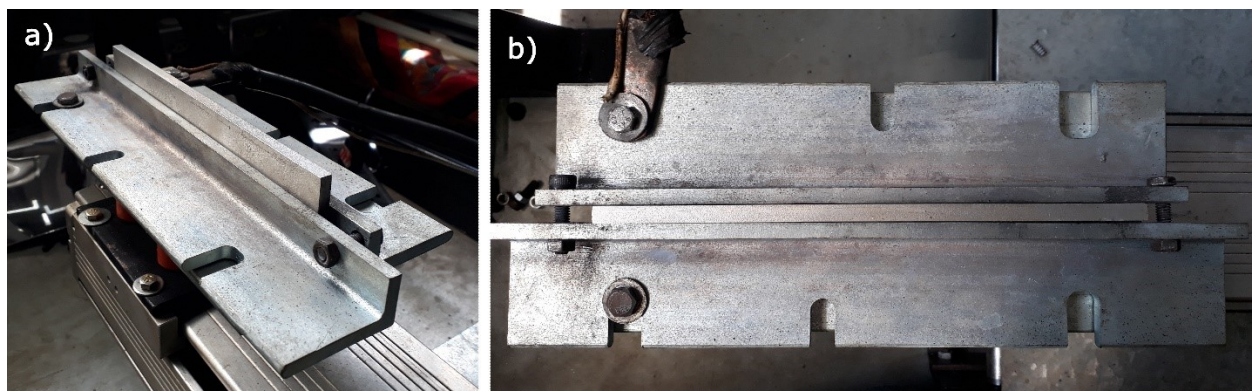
Test plate and plate holder: a) perspective view b) top view
